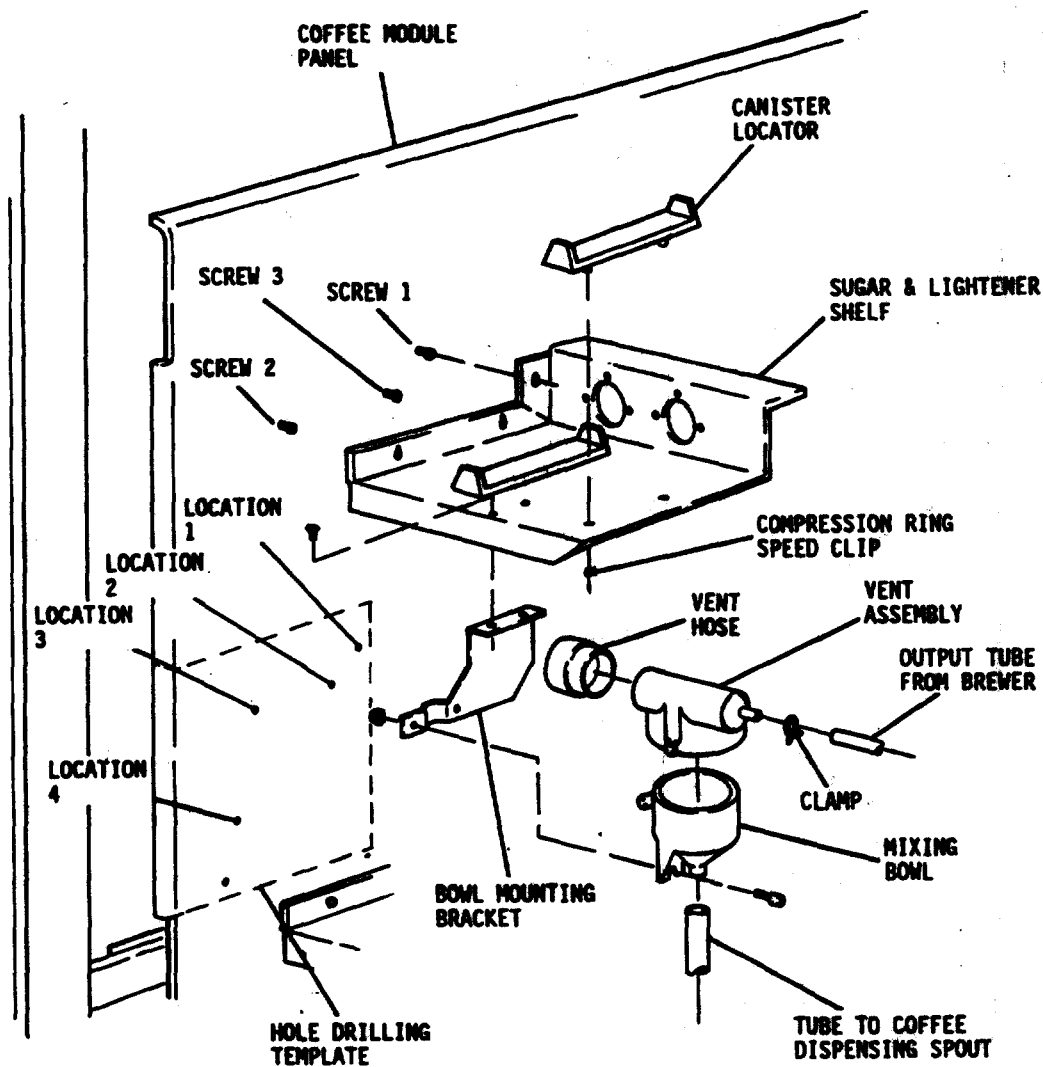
Assembly of New Sugar & Lightener Shelf
